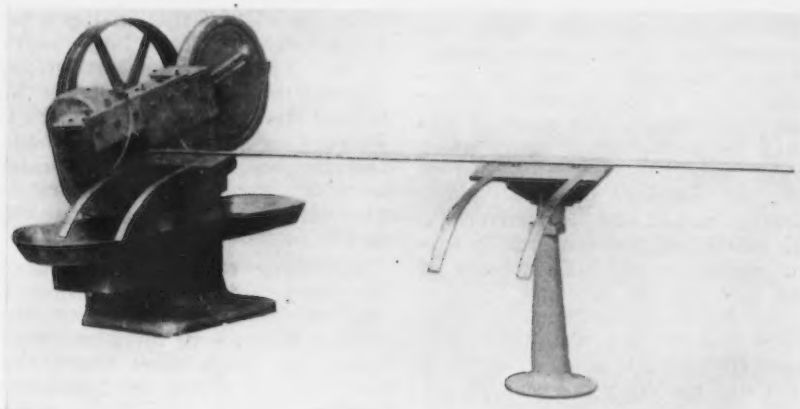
Threading one end of a long rod, with stand support for rod extension.
